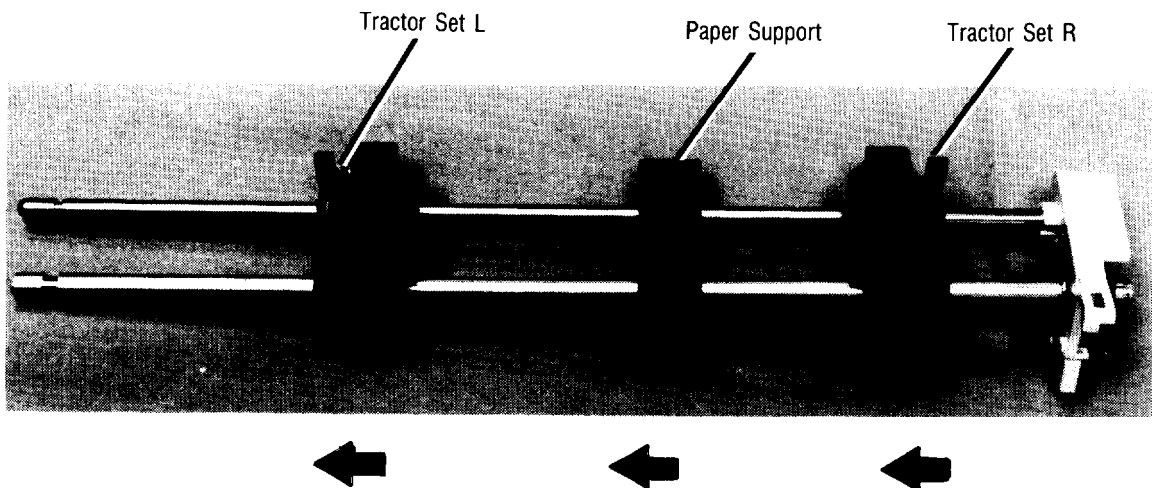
Removal of Tractor Set L, Paper Support, and Tractor Set R
